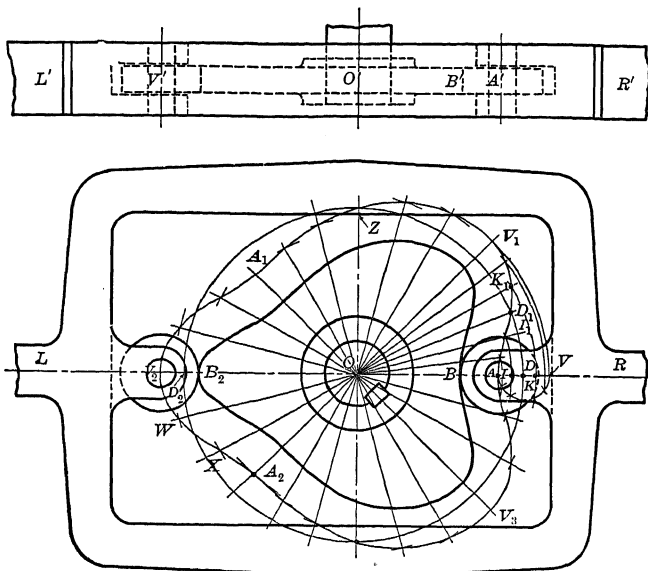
PROBLEM 13, SINGLE-DISK YOKE CAM
